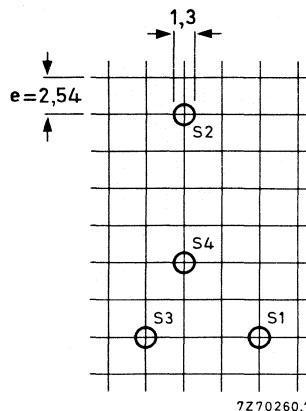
Hole pattern for mounting on a printed-wiring board (solder side).
